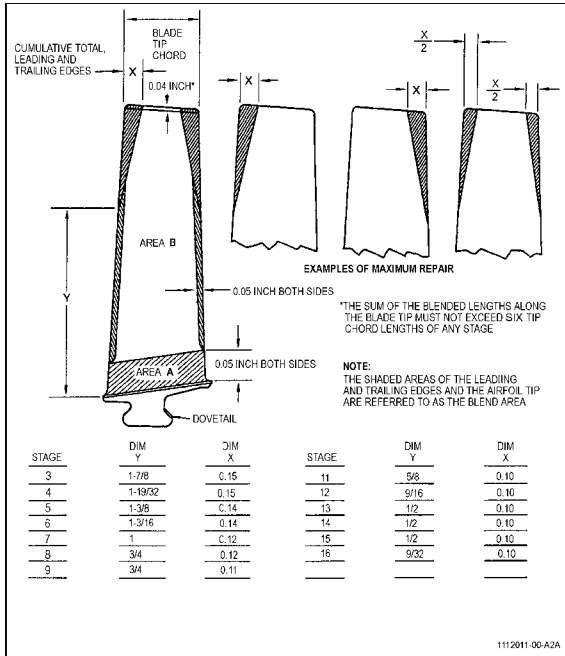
Stages 3 - 16 Compressor Blade Inspection Limits
